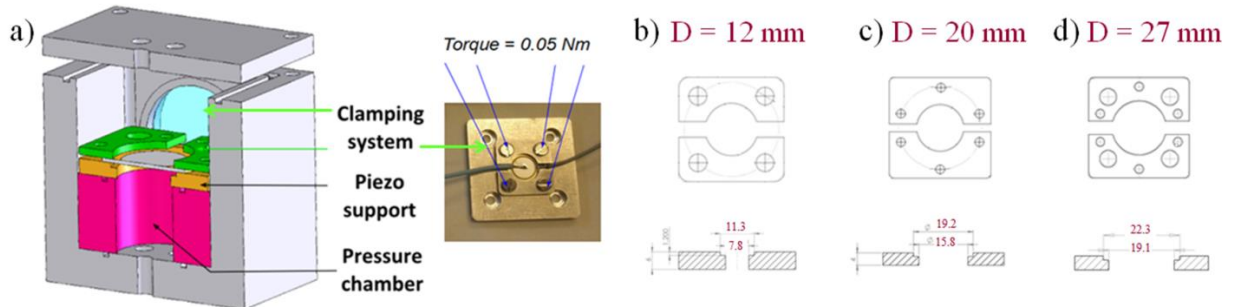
(a) Schematic cross-section of pressure chamber and a photograph of clamping system designed in CEA-Liten; clamping system for (b) 7BB-12-9; (c) 7BB-20-6 and 7BB-20-3; (d) 7BB-27-4.
